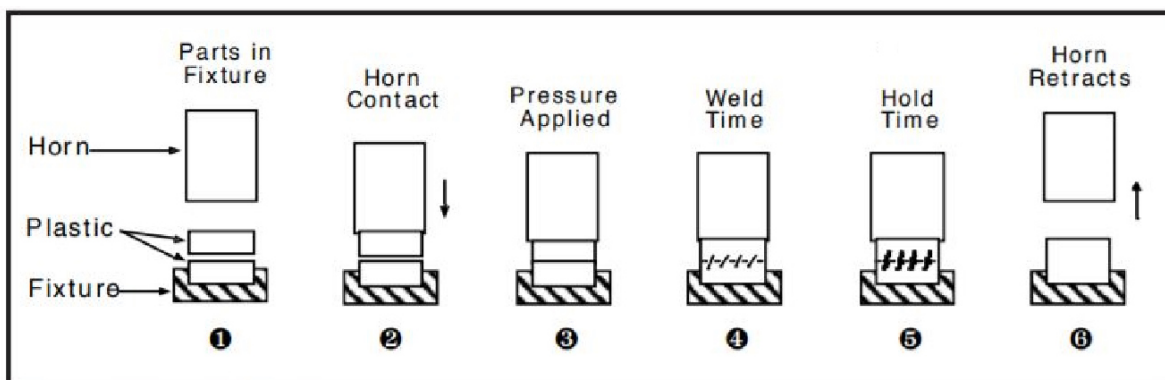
Basic ultrasonic welding process [15]
